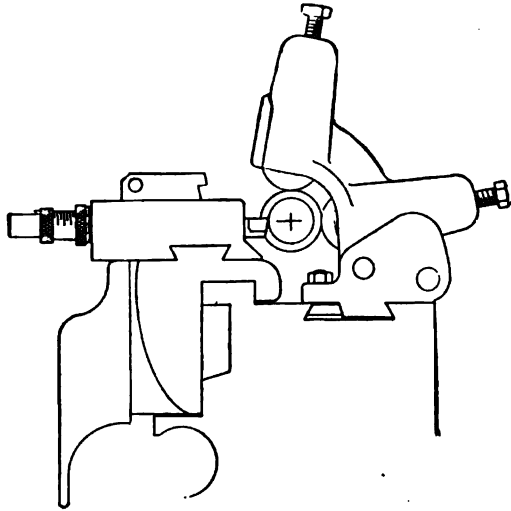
Method of attaching back rest and carriage in "Lo-Swing" lathe.
